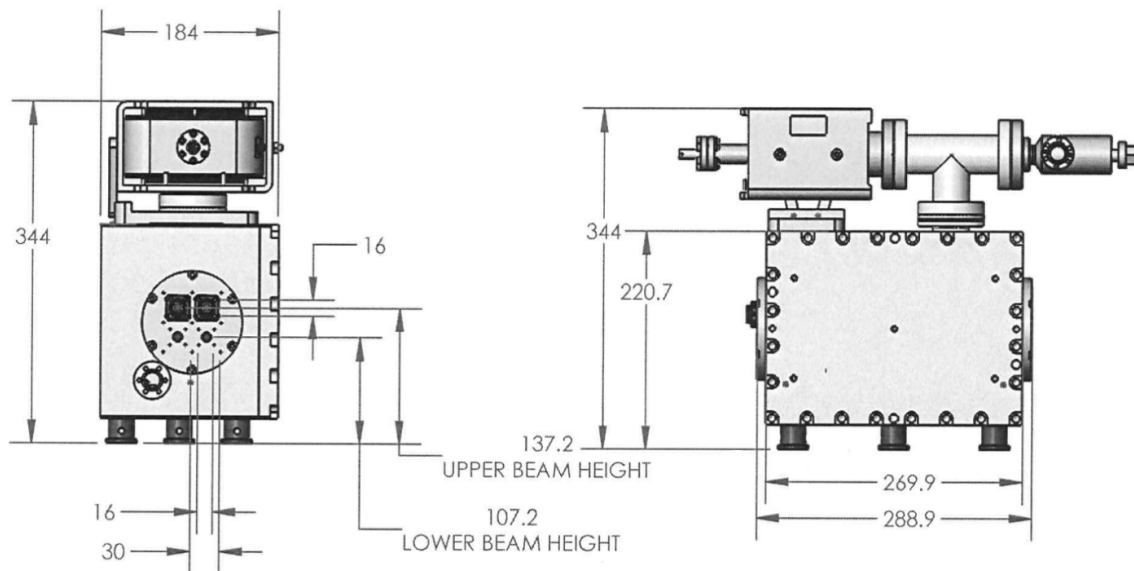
Technical sketch of the optical cavity housing used to keep the optical cavity stable and under vacuum. Numbers are given in mm. Sketch taken from housing manual.
